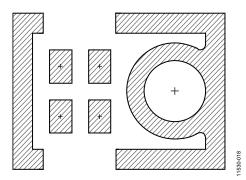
Example PCB Land Pattern with Broken Enclosing Ring
